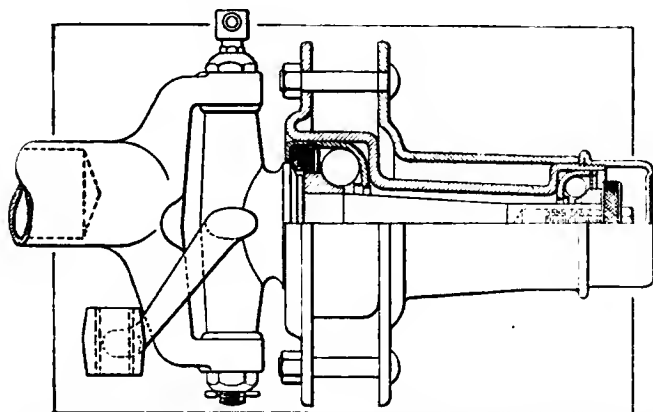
Front wheel hub with cup and cone ball bearings, felt closure, and cap screw replacing a hub nut
